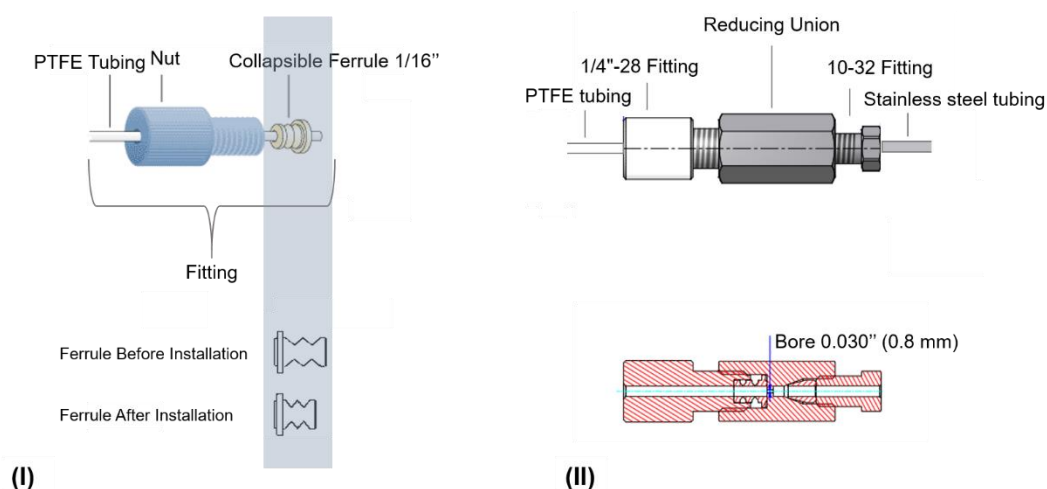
Schematic representation of the (I) flangeless 1/4 inch -28 tube end fittings with collapsible ferrules and (II) stainless steel reducing unions 1/4 inch-28 to 10-32 with a bore of 0.030 inch. Picture adapted from VICI catalog.
